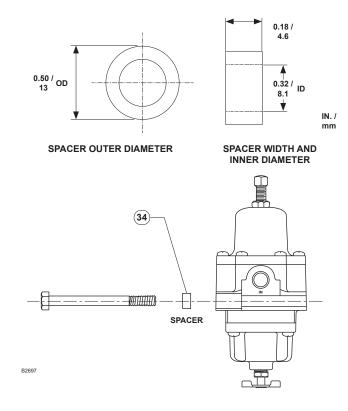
Spacer Diameter and Assembly (For Installing in an Existing Installation if the Mounting Bolts are Too Long)
